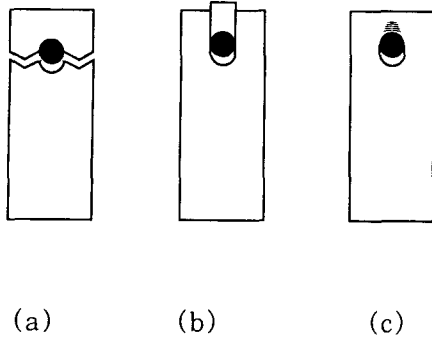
Failure mechanism for the pin jointed composites. (a) Net tension, (b) Shear out, (c) Bearing
